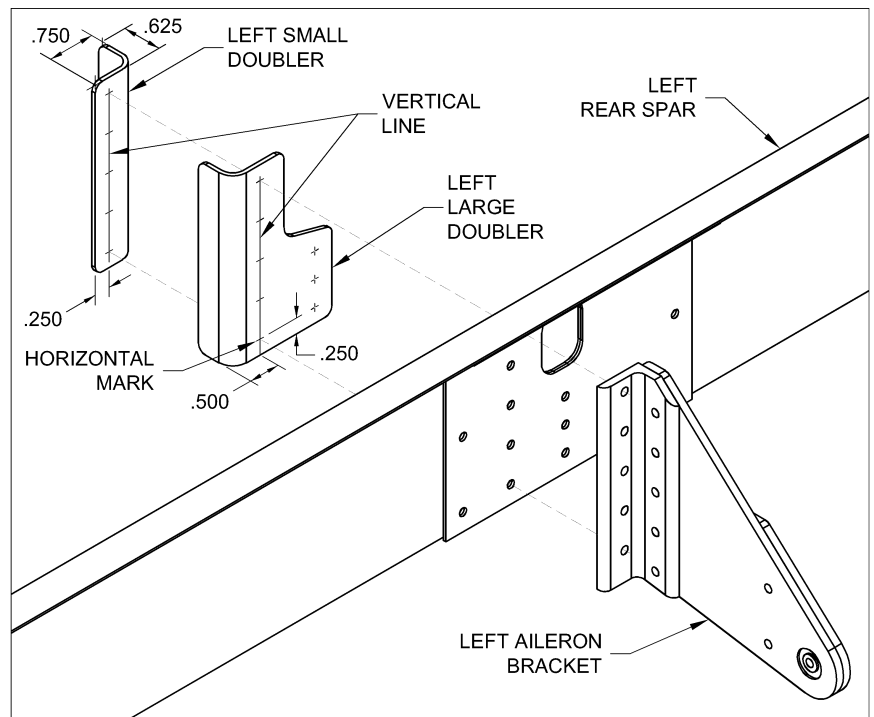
MATCH-DRILLING THE AILERON ATTACH DOUBLER
